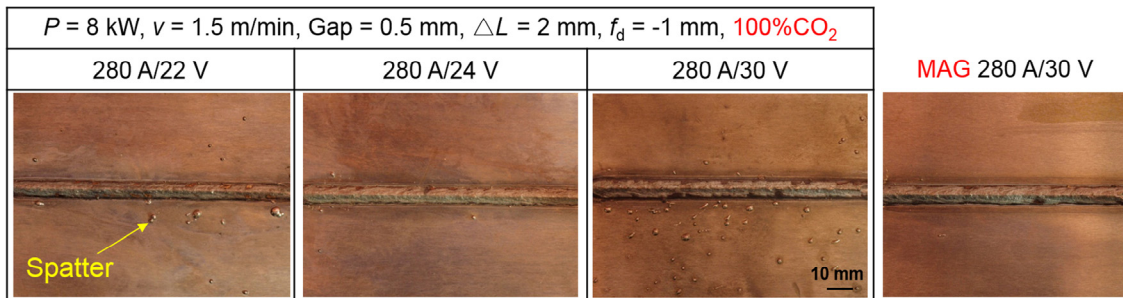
Surface appearances of weld beads produced by hybrid welding with CO_2 and MAG shielding gases.
